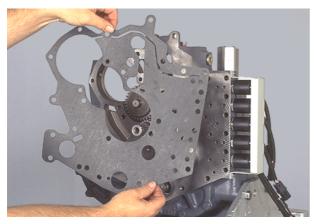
Install solenoid protection cover and mounting screws. Tighten screws to specified torque.
